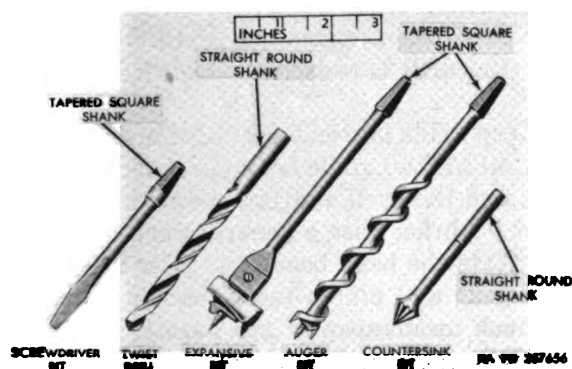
Types of bits and twist drills used with breast drill and ratchet bit brace.
